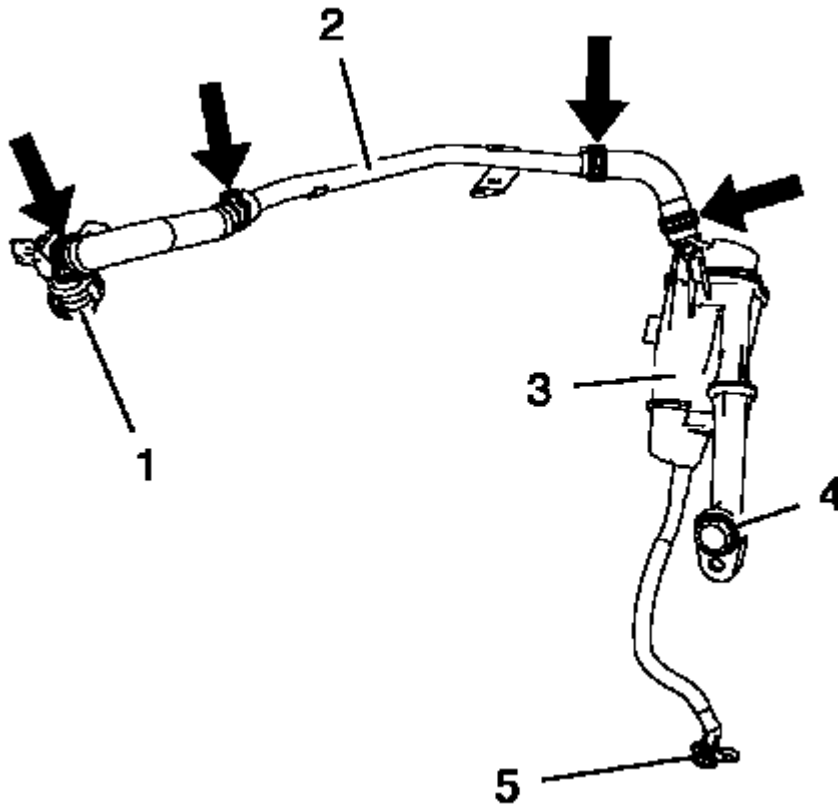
Positive Crankcase Ventilation Oil Separator Bolt
